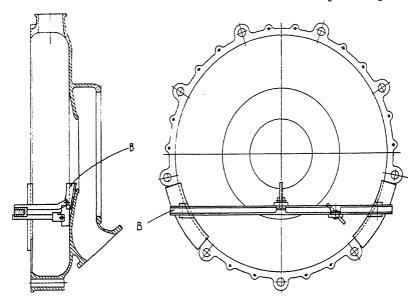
SETTING OF BEAM GAUGE FOR CHECKING IMPELLOR AND GUIDE VANE CLEARANCES.
